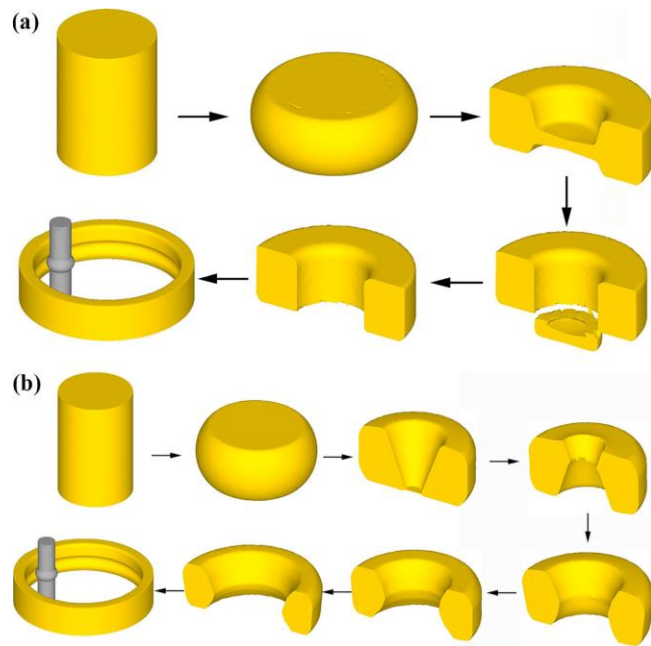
Bearing outer ring forging process (a) with straight punching pin (b) with V-shaped punching pin [11]
